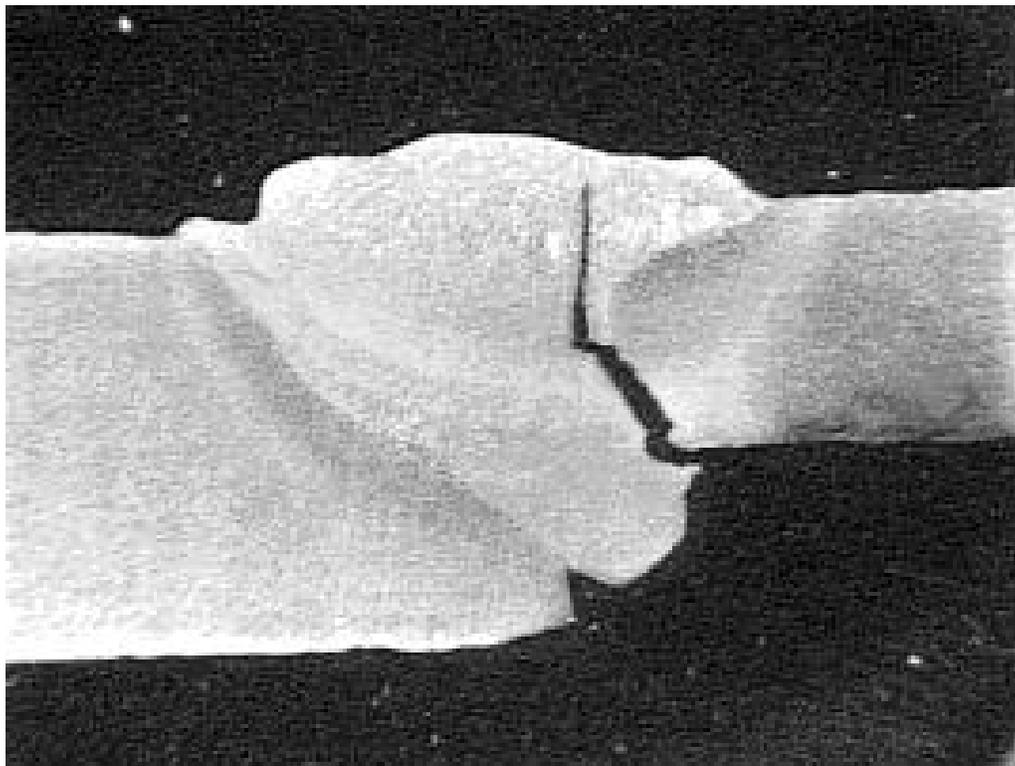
A cross-section through the weld showing the crack location.
